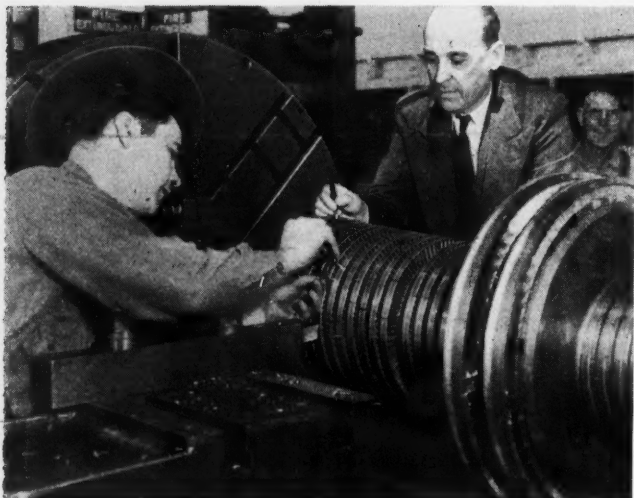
Machining Shroud Strips on High Pressure Turbine Spindle to the Correct Width. Extreme Accuracy is Necessary so that Steam may be Conserved
